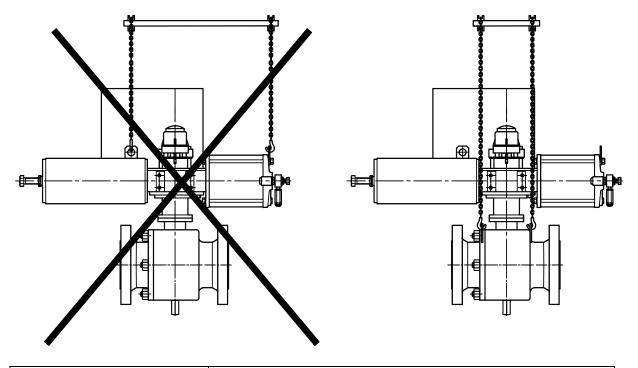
Handling of the VB2 valve equipped with gearbox/(electric actuator)
